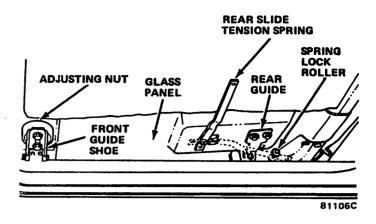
L-14 Front Guide Shoe and Rear Tension Spring
